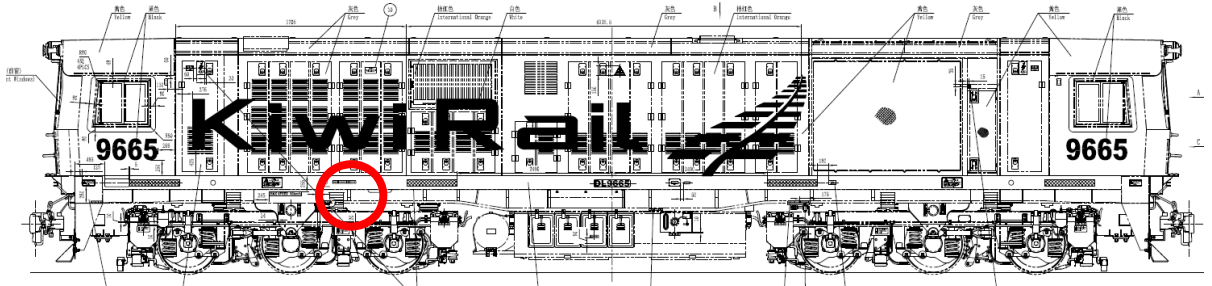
Park Brake Indicator Location (BCRK 130PS Brake Cylinders only)
